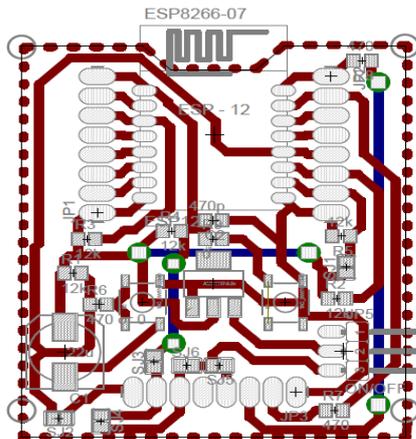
Layout view of AESP One board designed using EAGLE Software PCB design.
